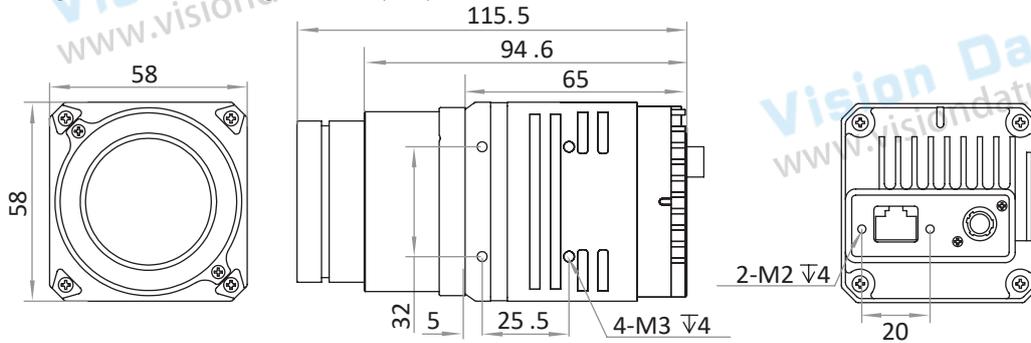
Mechanical Dimensions (in mm) of the GigE Cameras with 6.3mm/35mm focal length lens housing (The installation uses M2 and M3 screws).
